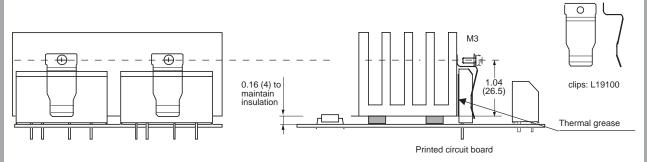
Clips with screws on standard heat sinks; dimensions in inches (mm)
